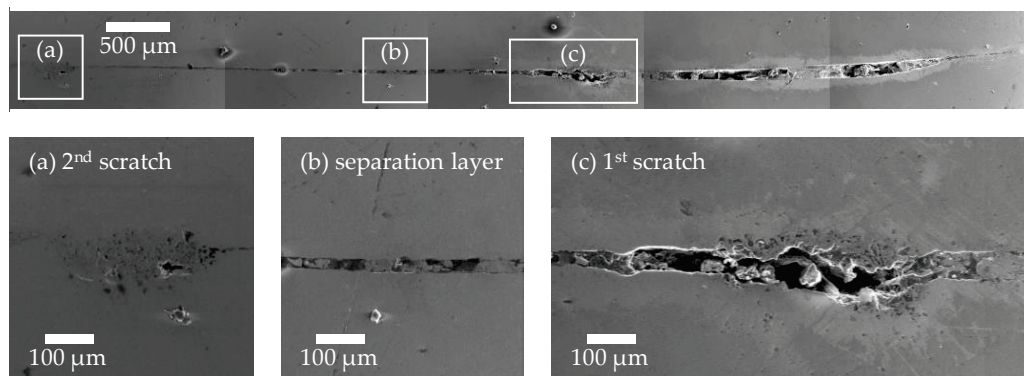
Panoramic view of the weld zone of a specimen with two medium-depth scratches oriented at 90° to the welding direction (on top: target, on the bottom: flyer, welding direction: from right to left, panoramic view stitched together from five separate SEM images). Magnification sections: (a) 2nd scratch, (b) separation layer with inclusions, (c) 1st scratch.
